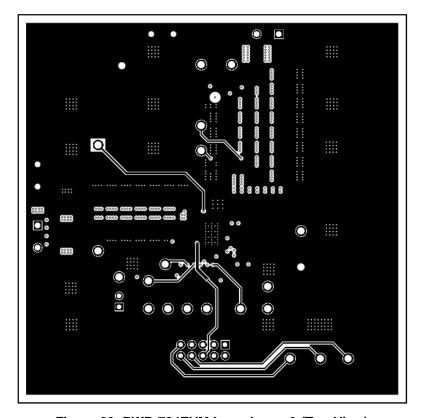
PWR-784EVM Inner Layer 3 (Top View)
